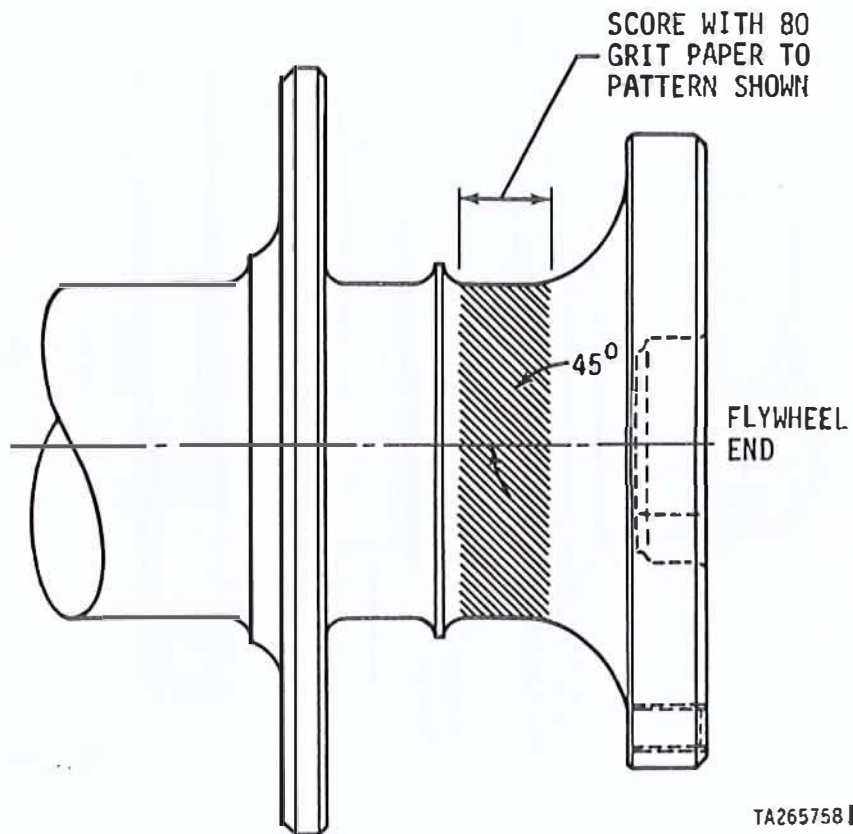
Rear oil seal wear surface on flywheel end of crankshaft.
